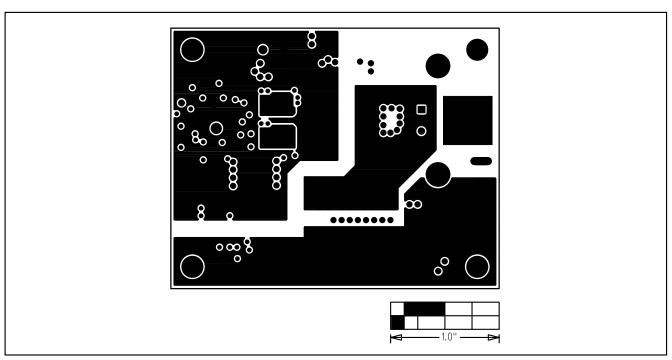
MAX5069A EV Kit PC Board Layout—Inner Layer, VCC Plane
